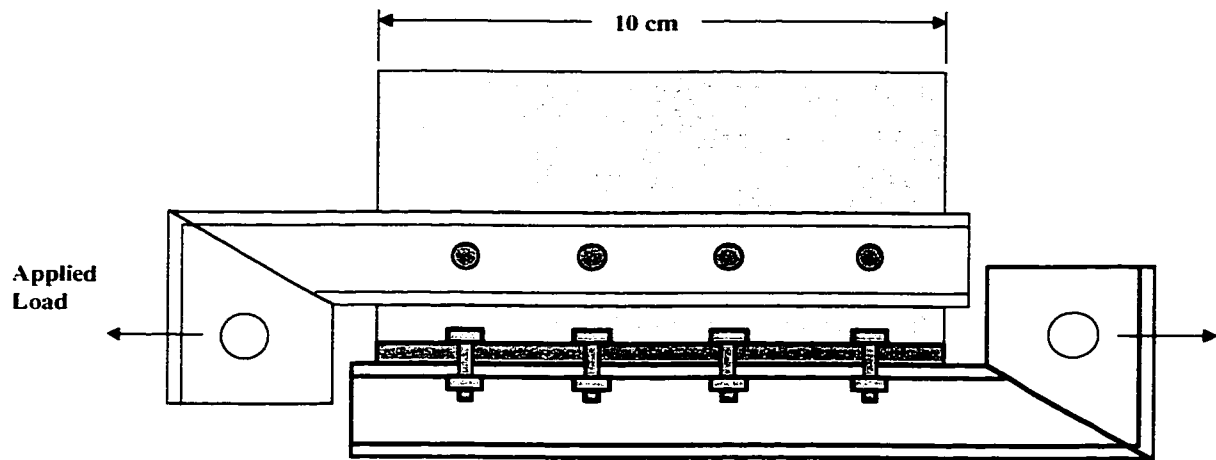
Rail Shear Experimental Fixture.
